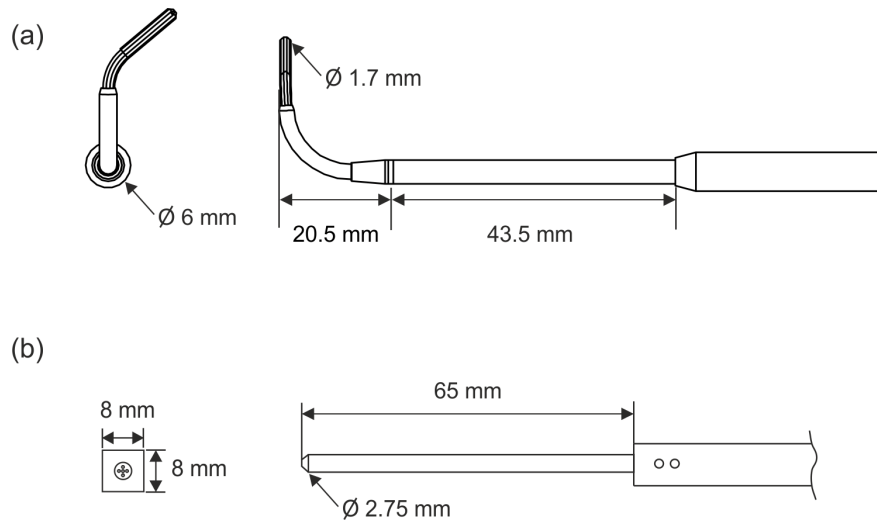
Dimensional drawing of the two five hole probes used in measurements.
